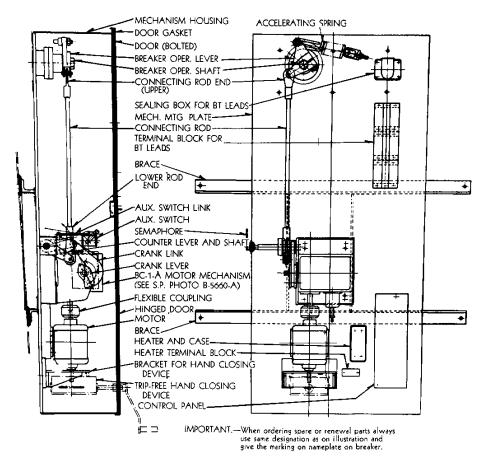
Type BC-1-A Motor Operated Mechanism, Mounted on Type BPO-B Breaker-Sectional View
